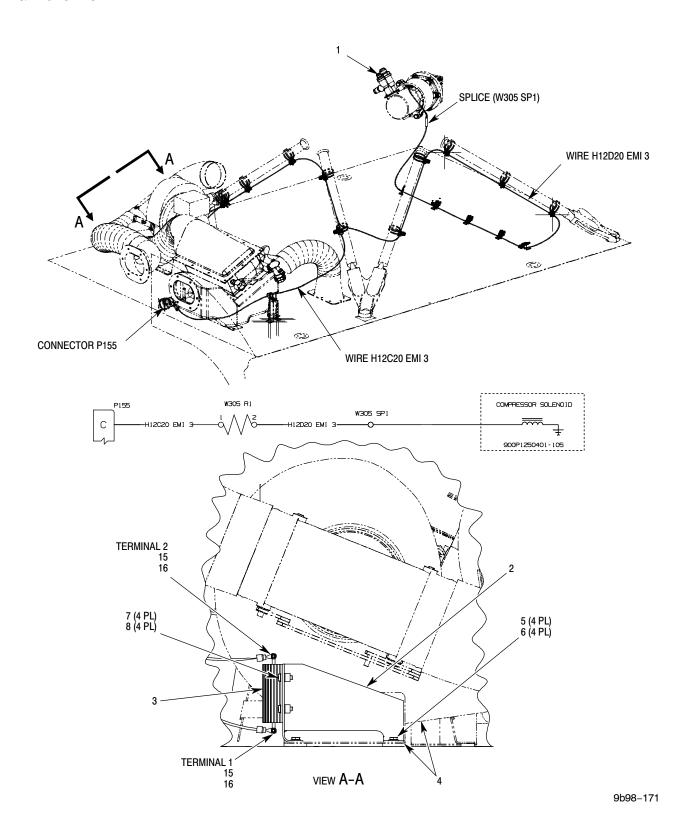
Installation of the Resistor Bracket Assembly and Compressor
